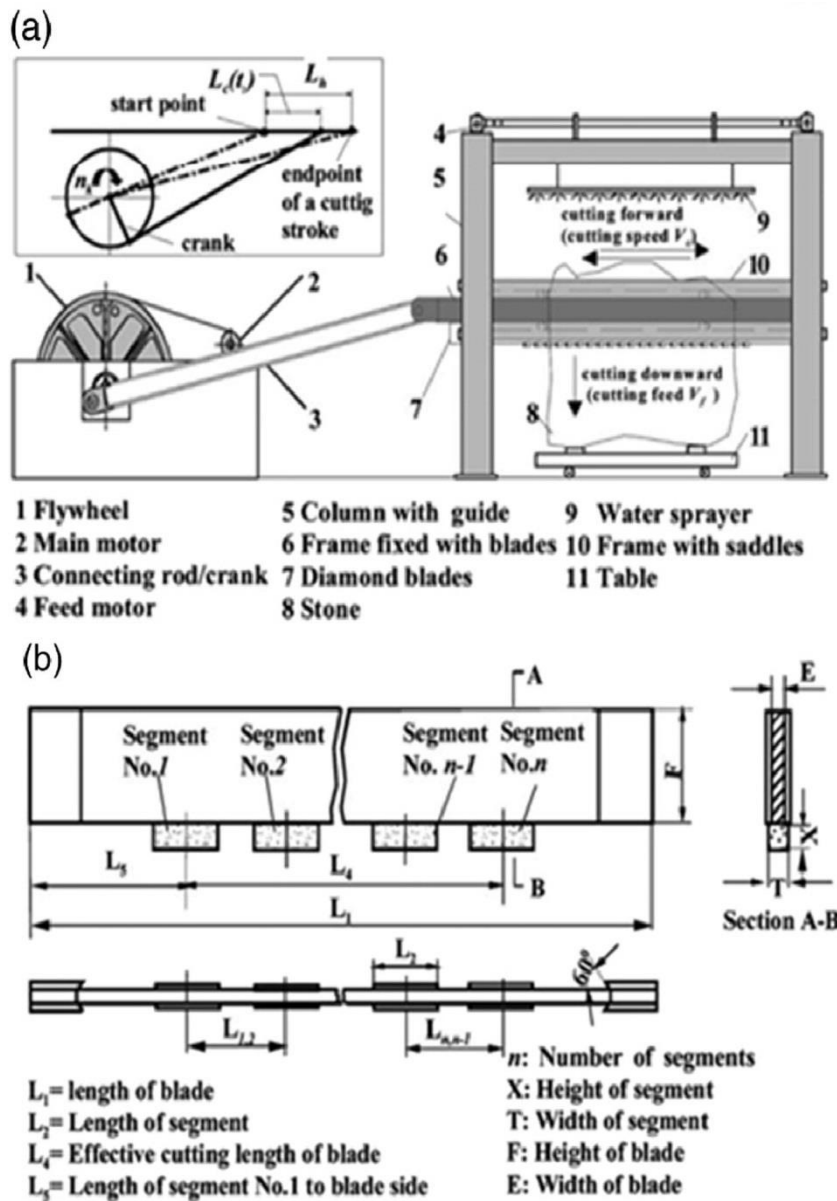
a) technical scheme of the gangsaw machine b) scheme of the blades used in gangsaw. (source: H. Zhang et al, 2016).
